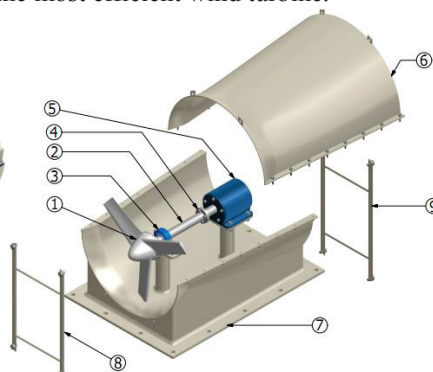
Exploded View of the Wind Turbine showing the Main Parts
